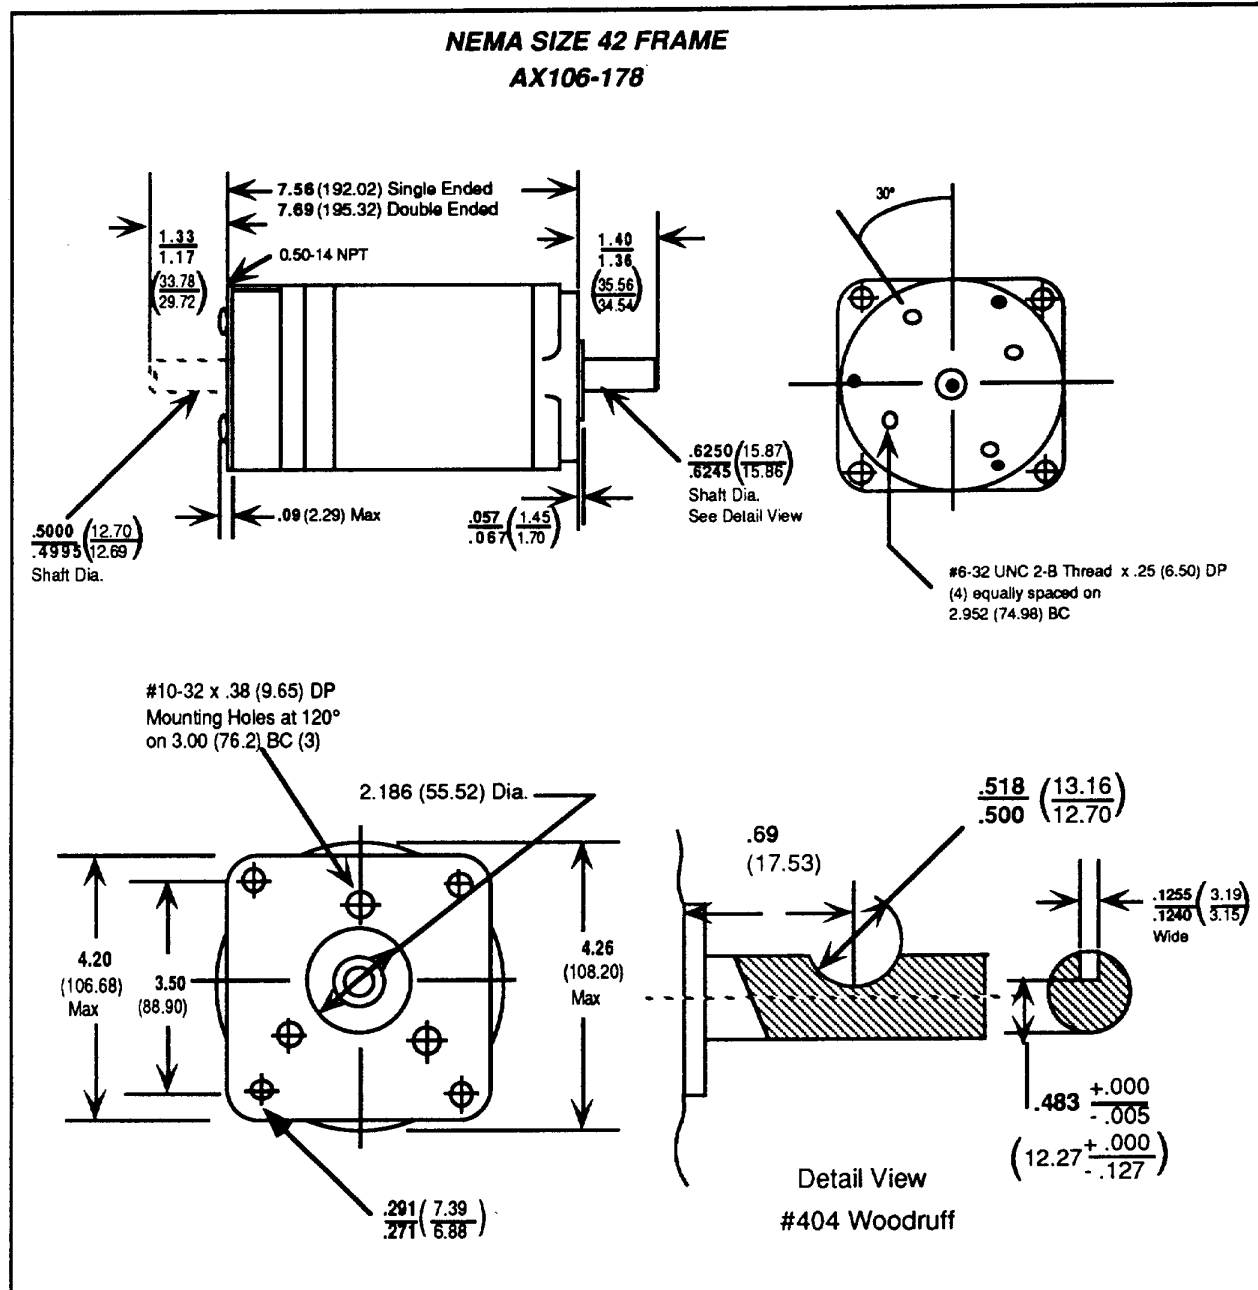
NEMA Size 42 (AX 106-178) Motor Dimensions
